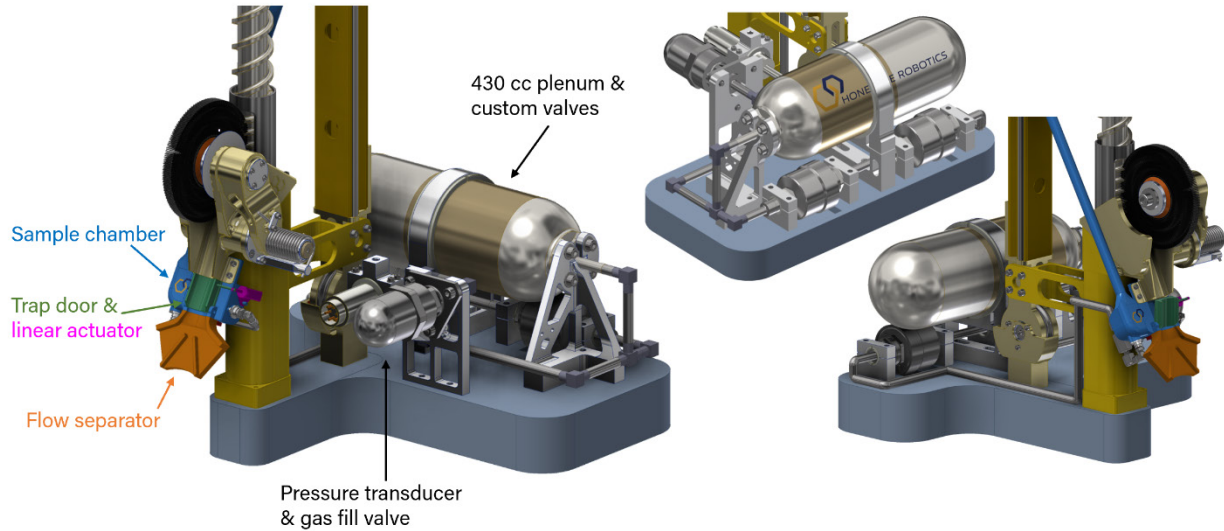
Left: Labeled major components of pneumatic transfer assembly. Right: Isometric views of the back and other side of assembly.
